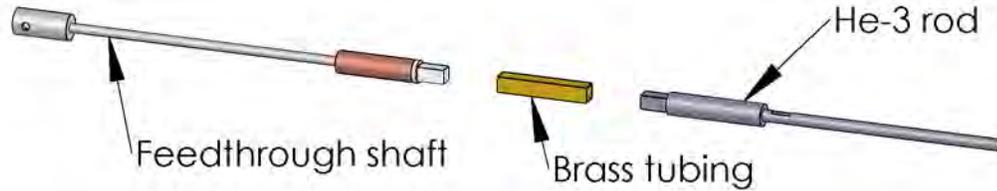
Illustration of the horizontal section of the rotating feedthrough mechanism. The feedthrough shaft connects directly to a vacuum feedthrough port in the top hat of the cryostat. A stainless steel He-3 rod is held on the He-3 coldplate and accepts a worm or mitre gear for translation of the axis of rotation from horizontal to vertical. A section of square cross-sectional brass tube transfers torque from shaft to rod while accommodating for motion of the two pieces along their axis of rotation due to thermal contraction. Additionally, the square cross-sectional dimensions of the rod, shaft, and tube, are chosen to create a weak thermal link between the shaft and rod.
